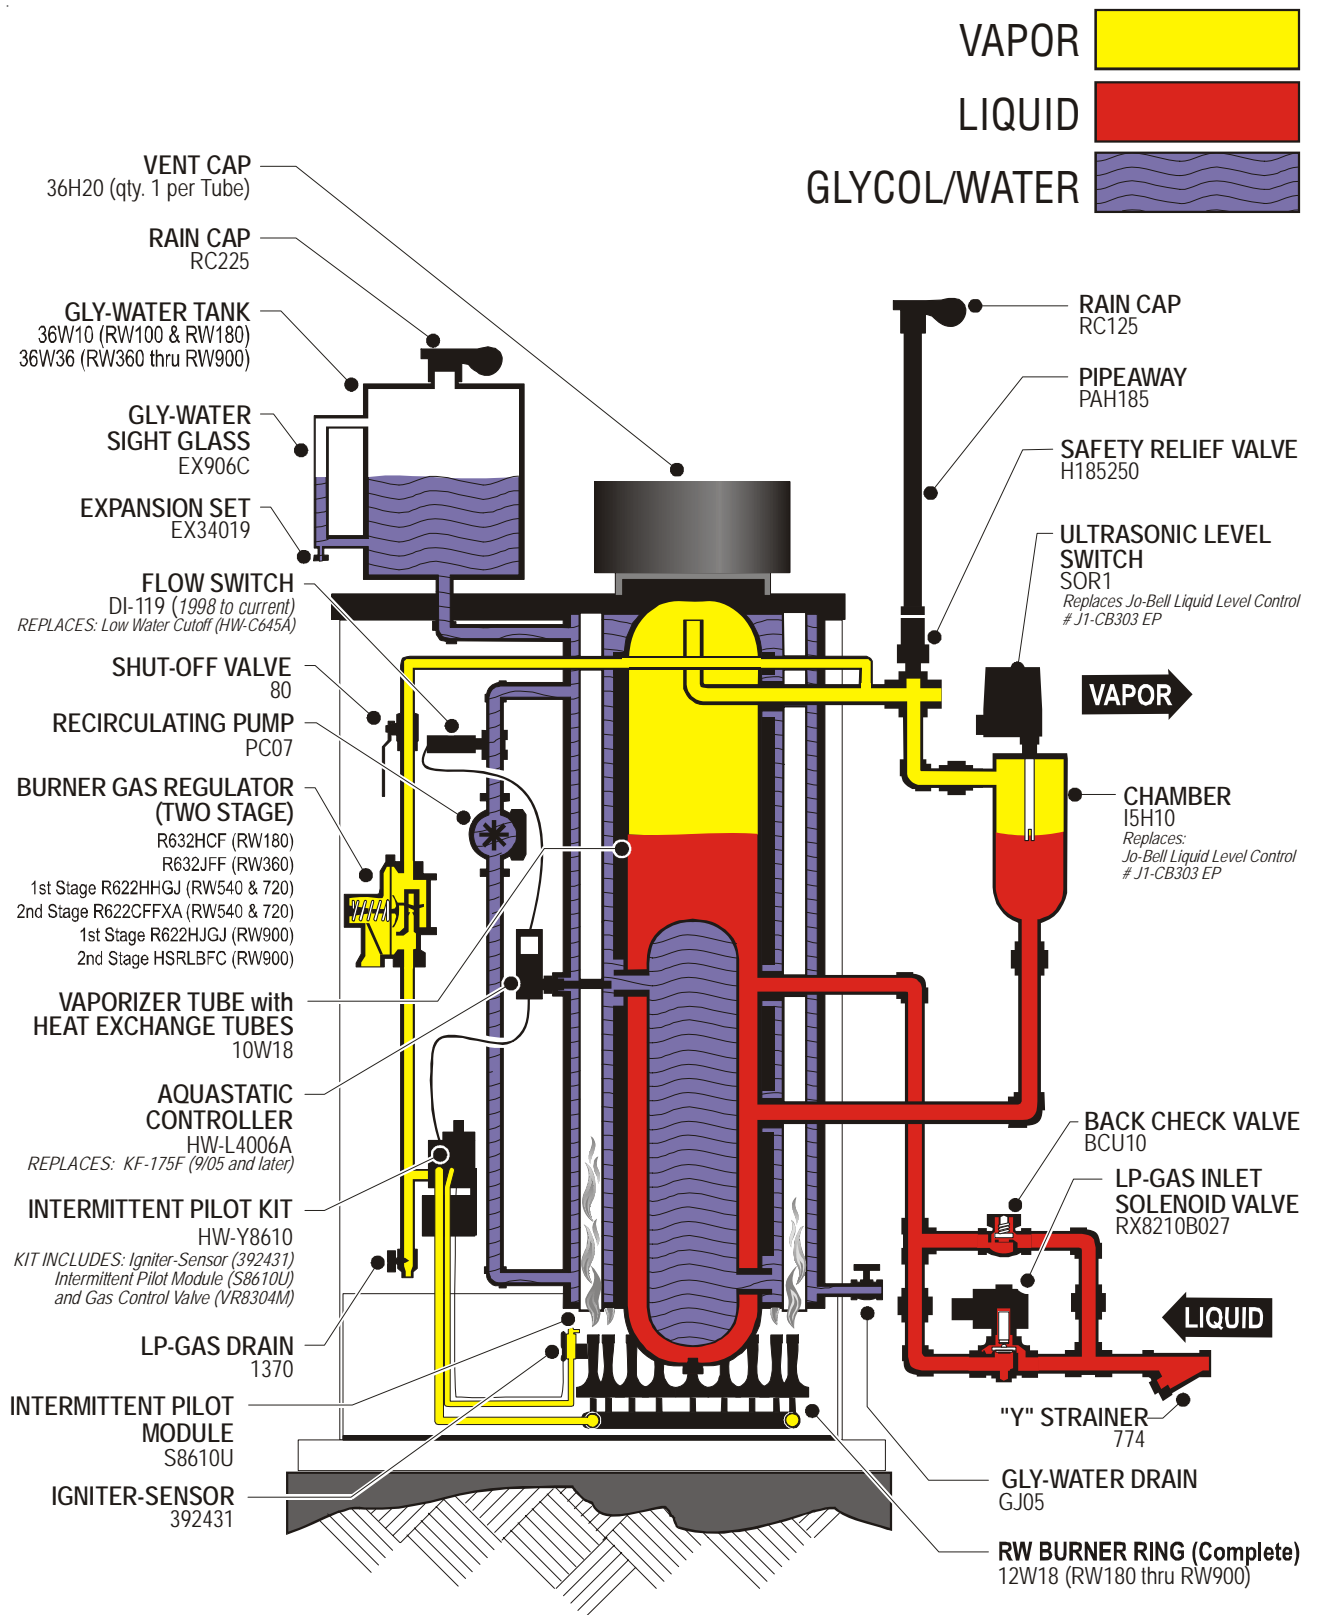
RW180 thru RW900 Cutaway Drawing
